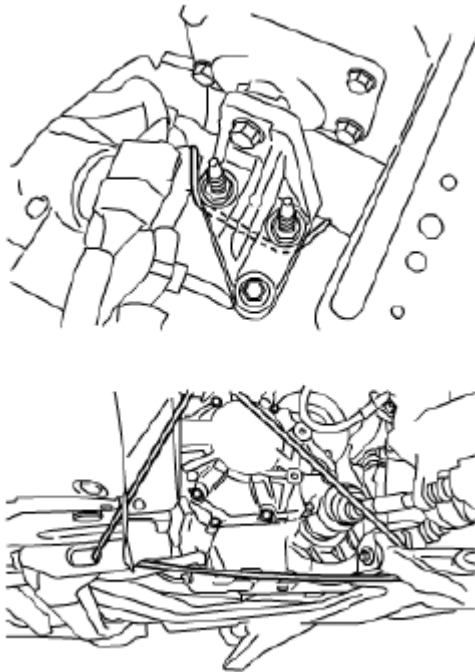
Identifying Steering Lower Shaft & Pinion Shaft
